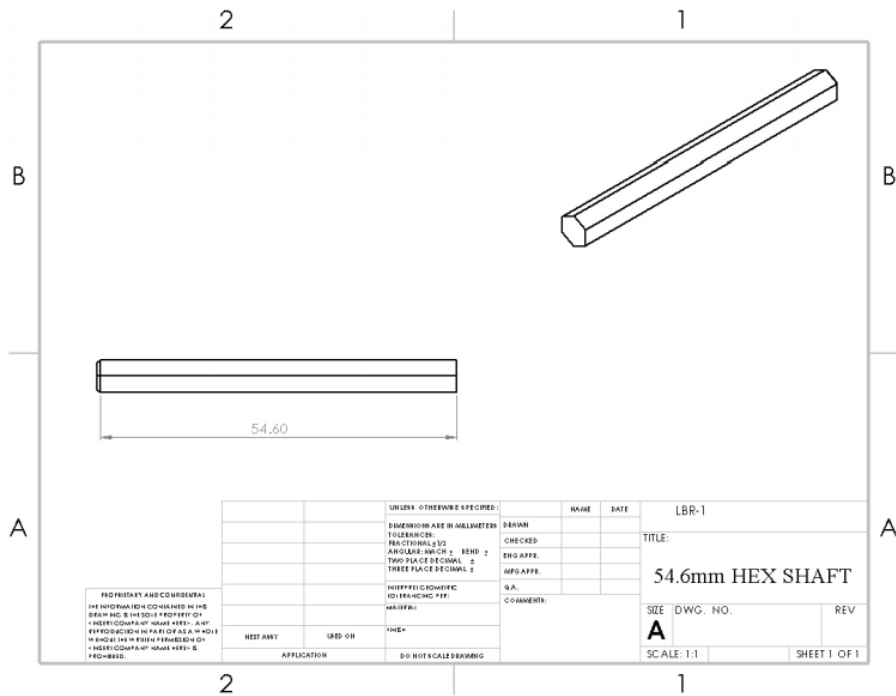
Part drawing of a hex shaft for the chain-and-sprocket system on the linear slide assembly
